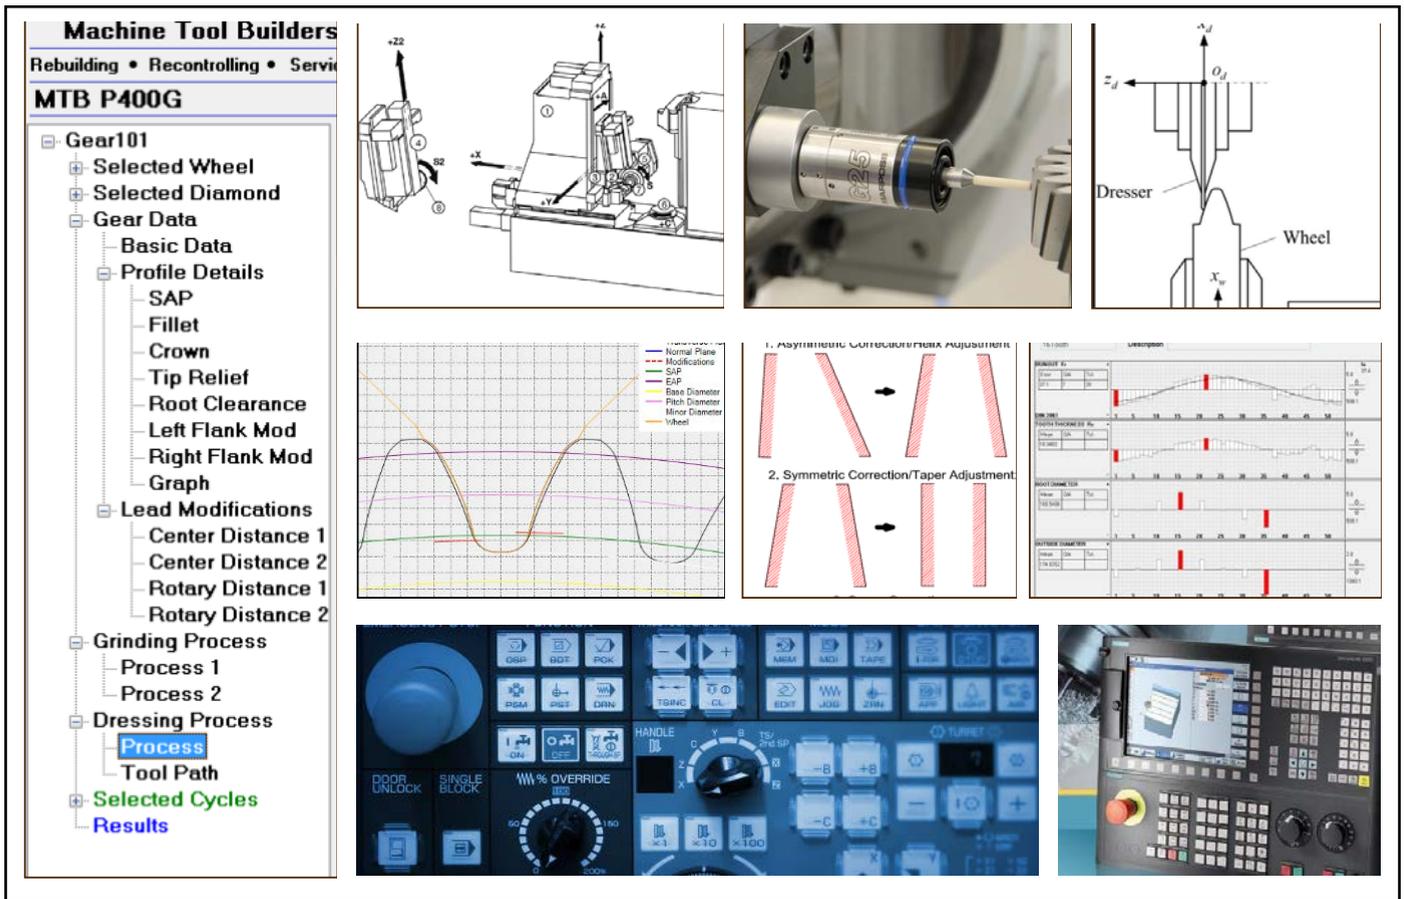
Example of contemporary gear form grinding machine with a lot going on.
